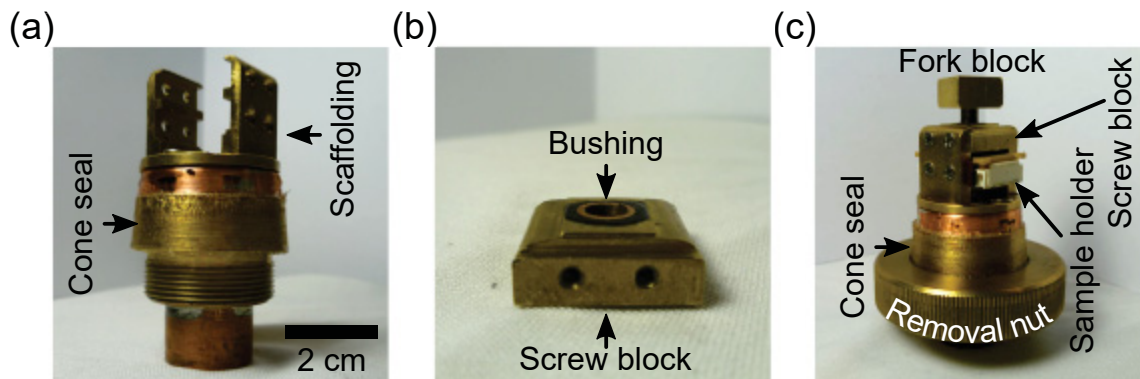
QTSE set-up assembly in sample space. (a) Cone seal with scaffolding. (b) Screw block with epoxied bushing. (c) Fully assembled QTSE assembly with screw block, fork block, and sample holder in the scaffolding on the cone seal. Large brass nut for removing cone seal from the probe.
